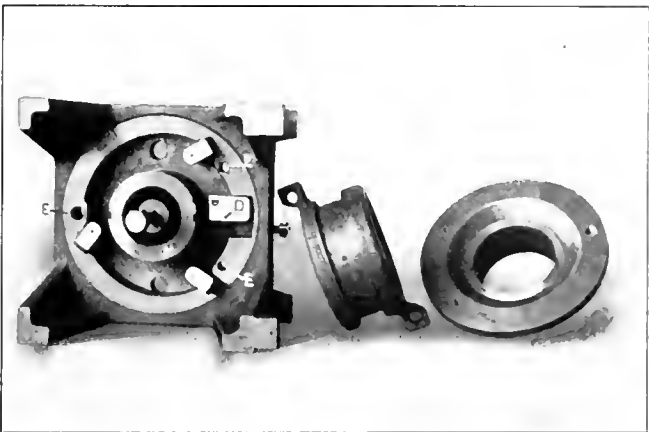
Drill Jig shown in Fig. 78, with one of the Pieces to be Drilled in Place.
